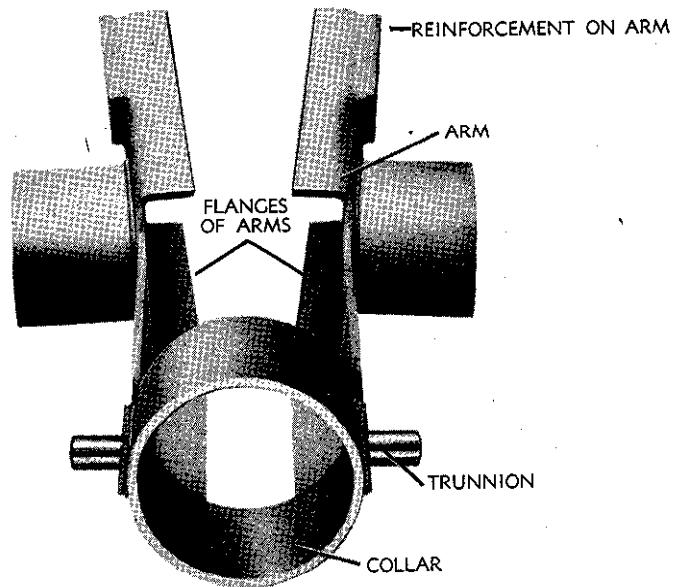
Fitting Jettison Roller Bracket to Turret To Be Welded
